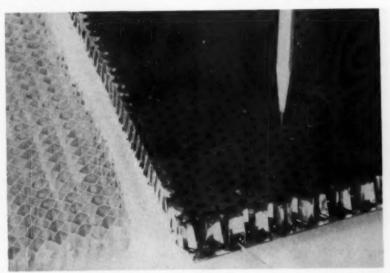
With one facing removed, honeycomb panel (right) exposes large bonding area with excellent filleting.
